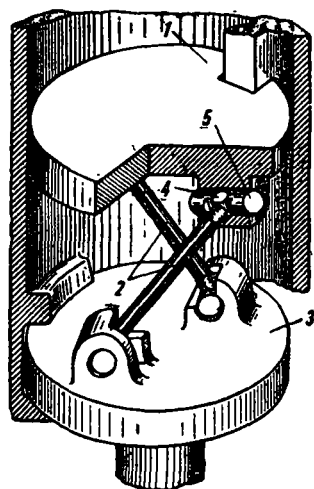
Diagram of the mechanism of pneumatic and hydraulic drive: 1—Piston; 2—Tie rod; 3—Rotor; 4—Bearings; 5—Bearing bush.
